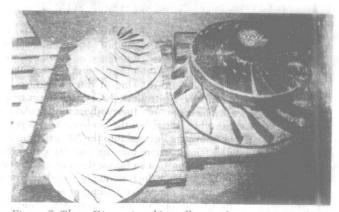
Three Dimensional Impellers in the As-Cast Condition and Ready for Final Machining.
